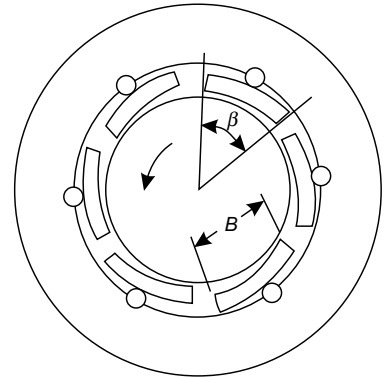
Schematic diagram of a multiple-wedge bearing
